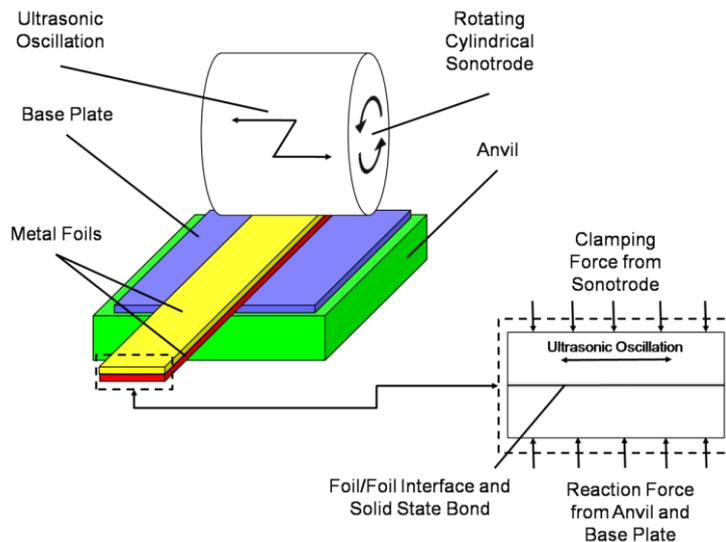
Simplified model of ultrasonic sheet metal 3D Printing[104]
